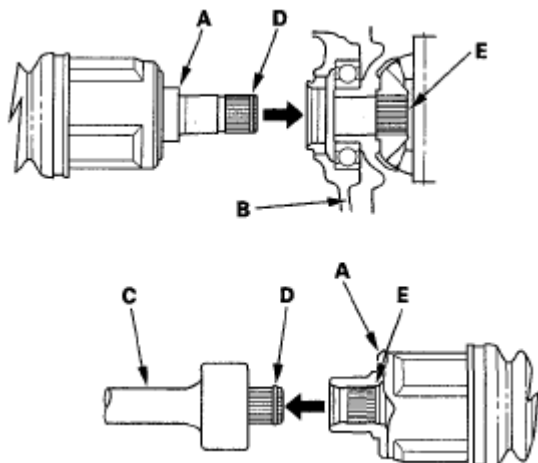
Inserting Inboard End Of Driveshaft Into Differential
